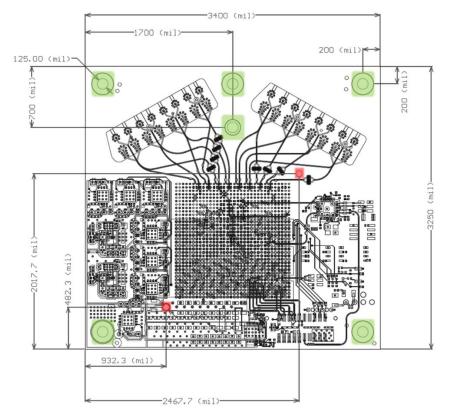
Physical dimensions of board (in green) and heat sink fixture (in red) mounting hole
